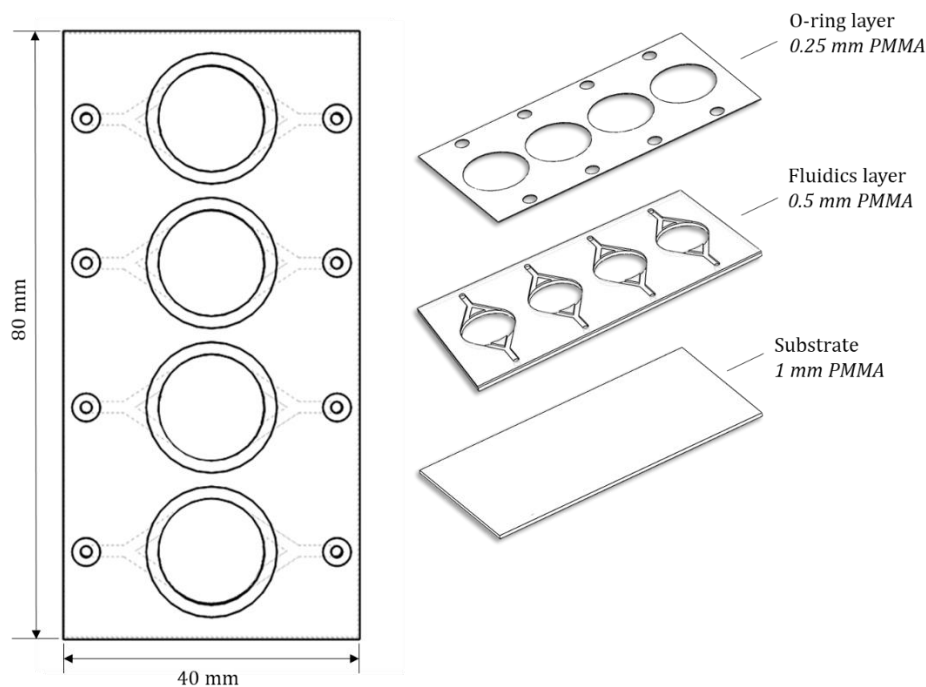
Exploded view and description of the layers conforming the device (Device v3).
